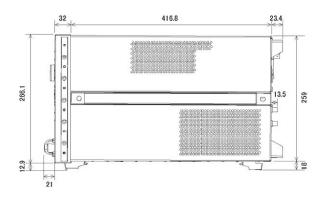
Dimensions (side view, in millimeters, nominal)
